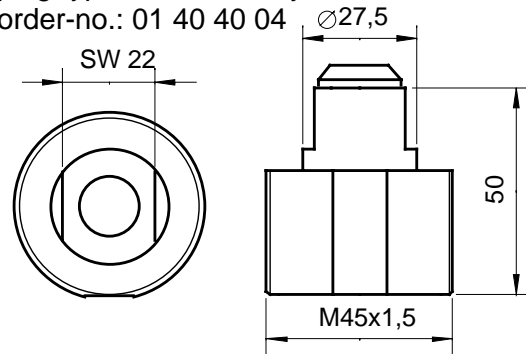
Dimensions of sensors E01, E02, E04, E05 and related attachment versions
